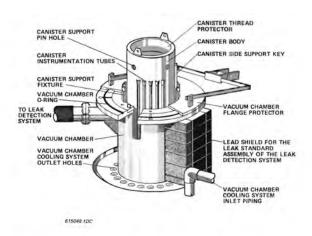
Weld Pit With Empty Canister Arrangement
